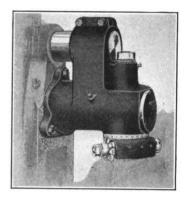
High-speed attachment. Fig. 58.—Spiral milling attachment.
